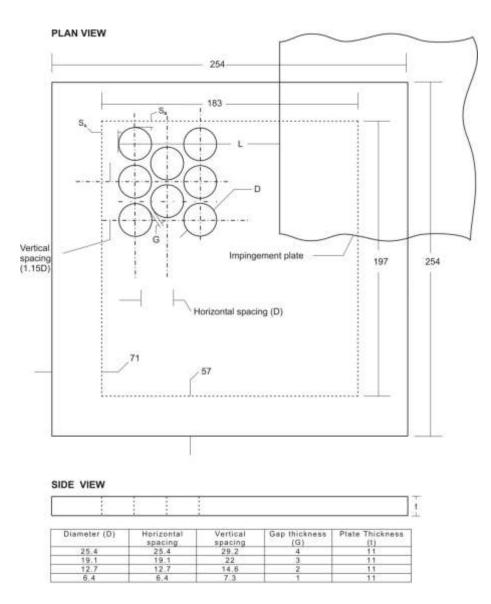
Dimensions of Perforated plates. (All dimensions are in mm.)
